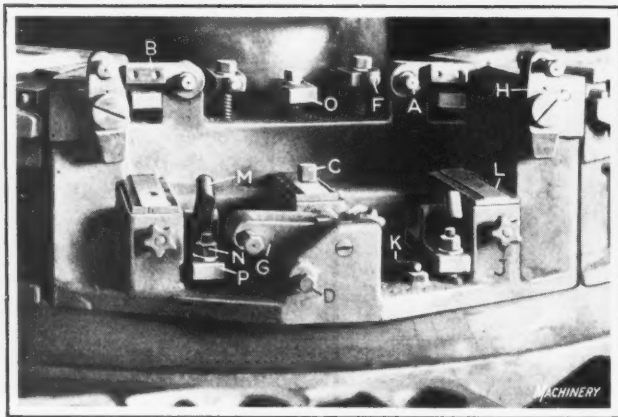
Fixture shown in Fig. 2, for milling the Top and Bottom Sides of the Cylinder Block
